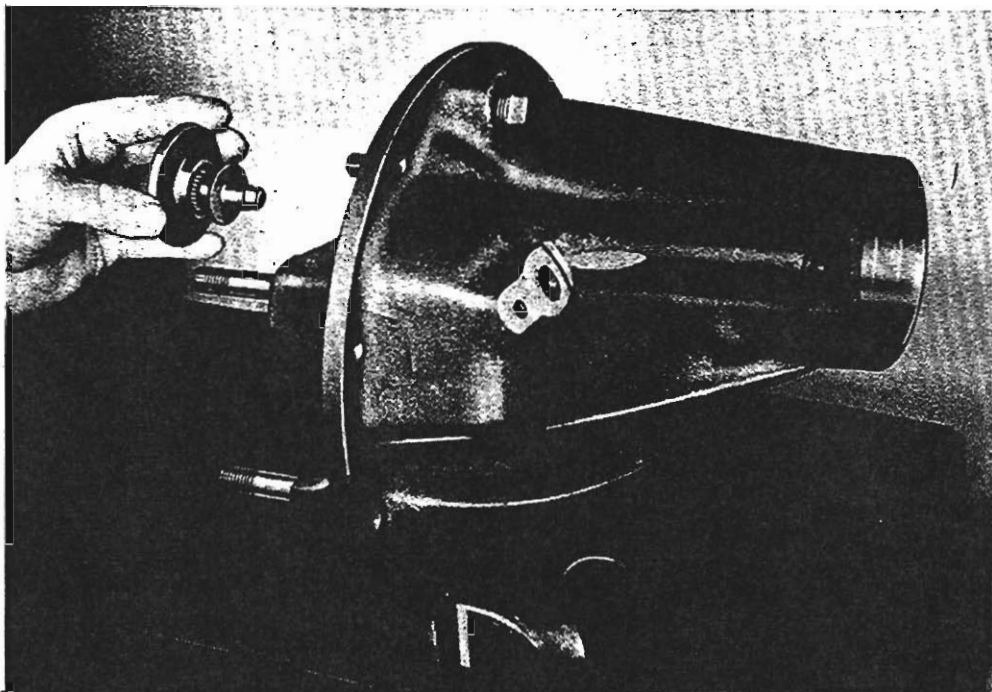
Check Bearing Preload with Tool J-2571-B and Adjust to 2 to 2½ Foot Pounds Torque
